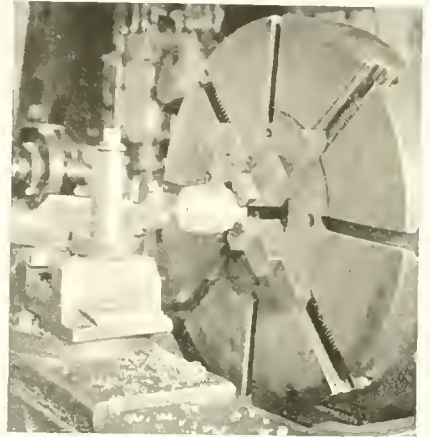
BUILDING UP OPERATIONS. (Note that the weld is easily machined.) 5/32" Electrode 130 Amp., 20 Volts will deposit one pound of metal in approximately 30 minutes. 3/16" Electrode, 175 Amp., 22 Volts will deposit one pound of metal in approximately 30 minutes. Using 5/32" Electrode, one cubic inch of steel may be deposited in about 7 1/2 minutes. The metal when deposited on mild steel by the metal electrode process will always be soft and easily machined. The carbon electrode process should be used for building up operations only when the built up piece can be later annealed to take out contraction strain.
